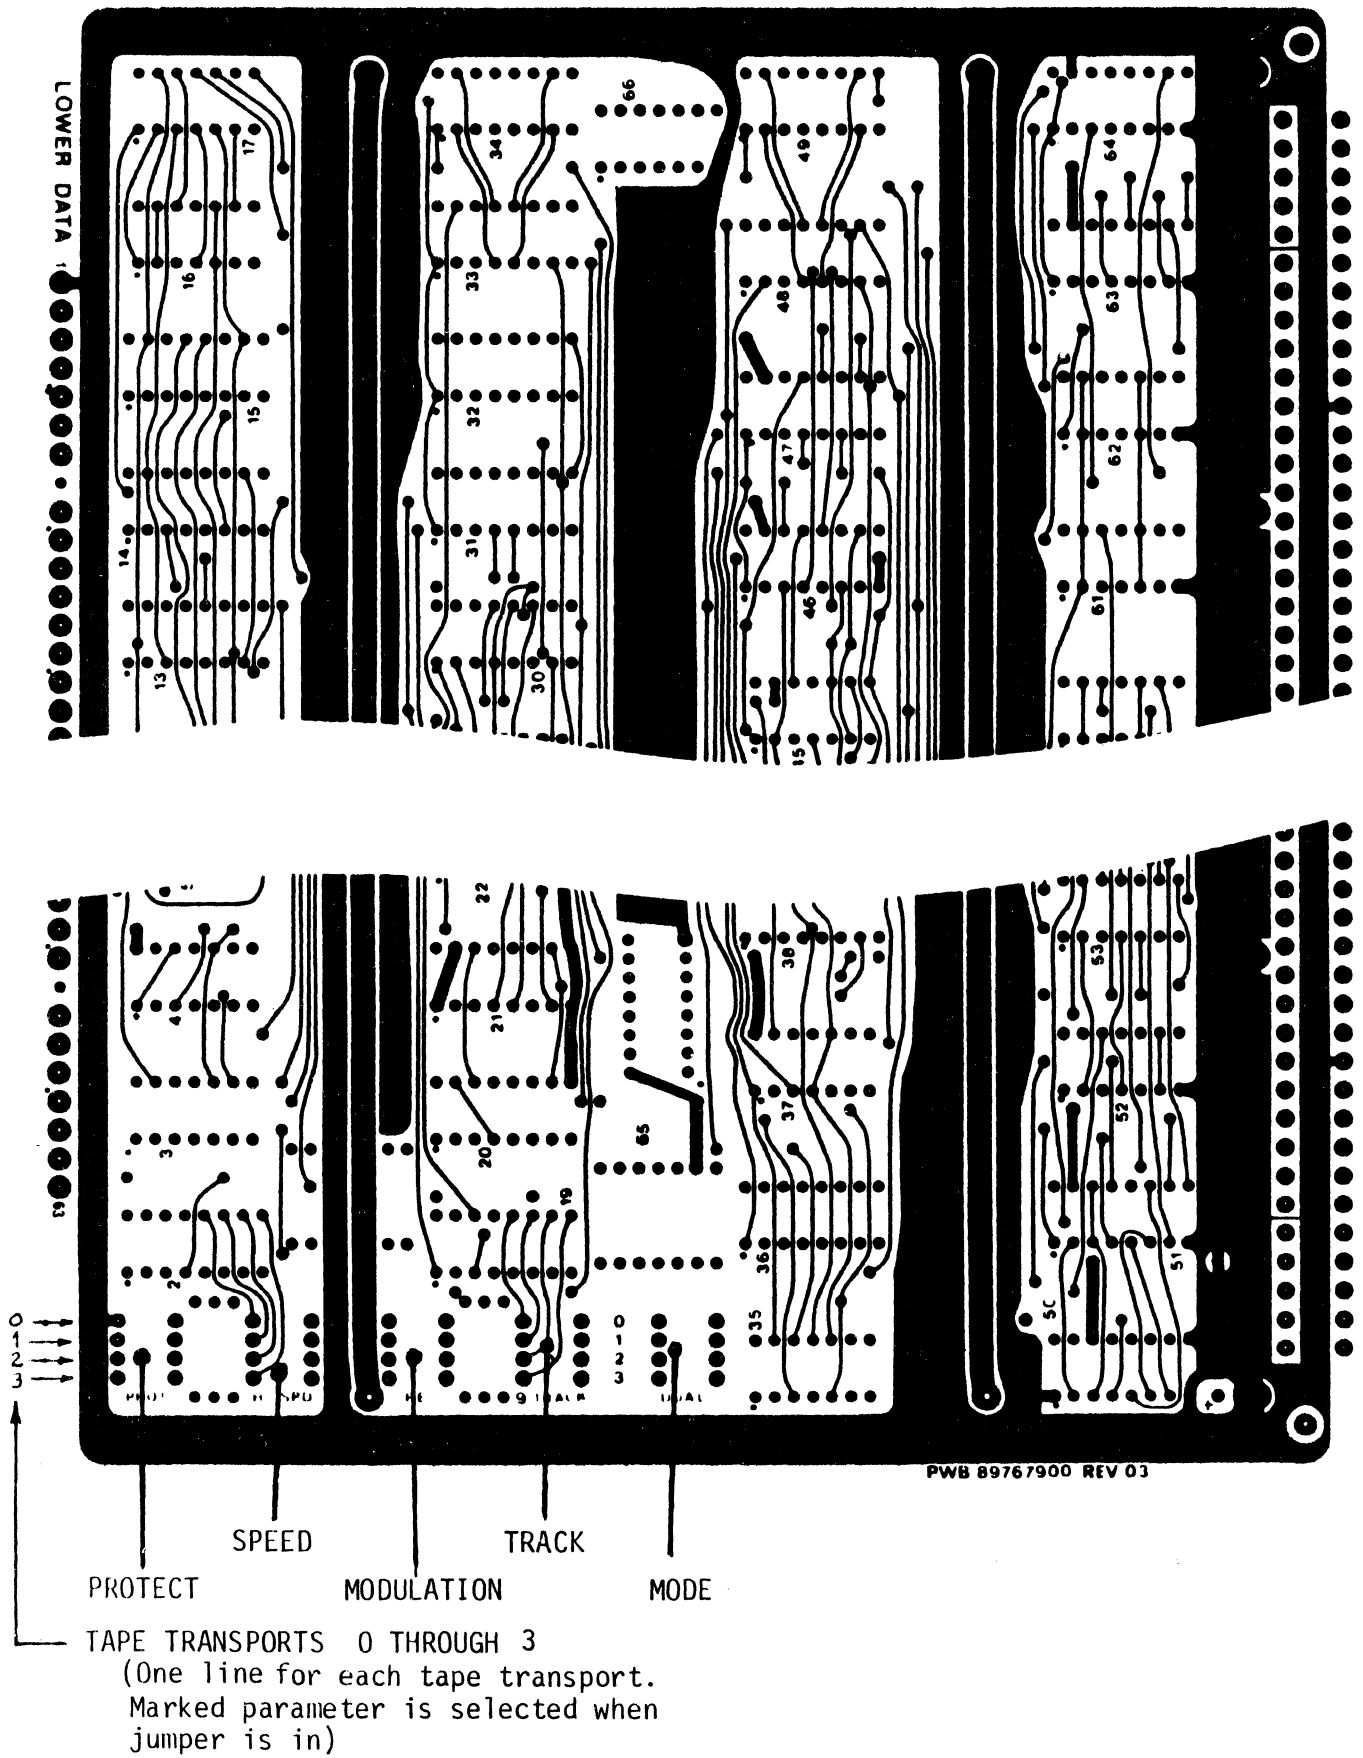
Lower Data Section Showing Jumper Plug Positions
